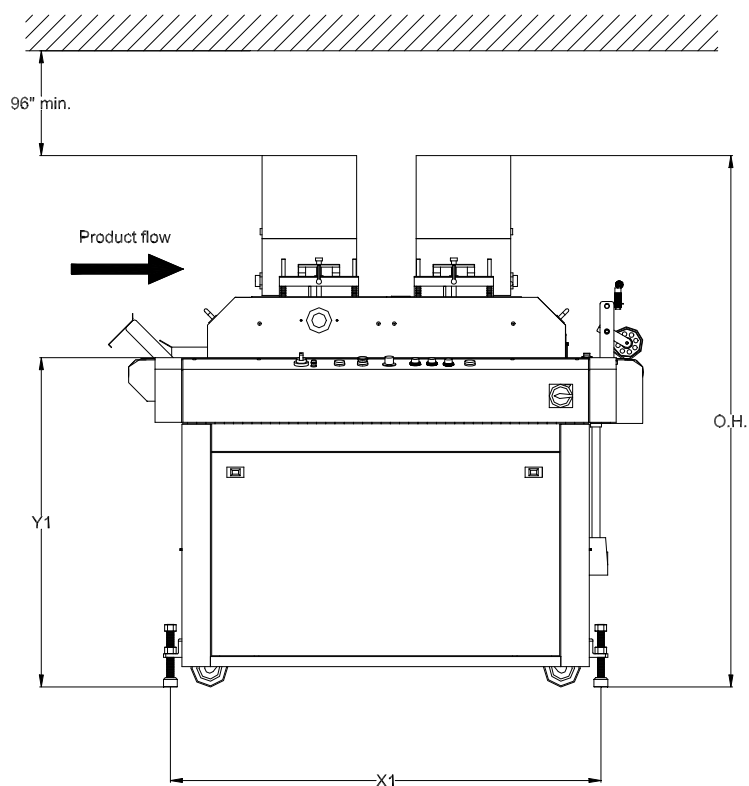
BK750 UV Curing Base Dimensions - Right View.
